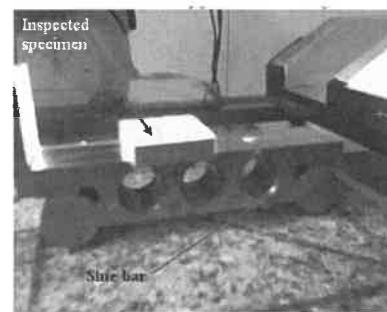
Setup Used To Ensure Parallelism Between Surface Of Specimen And Reference Plate.
